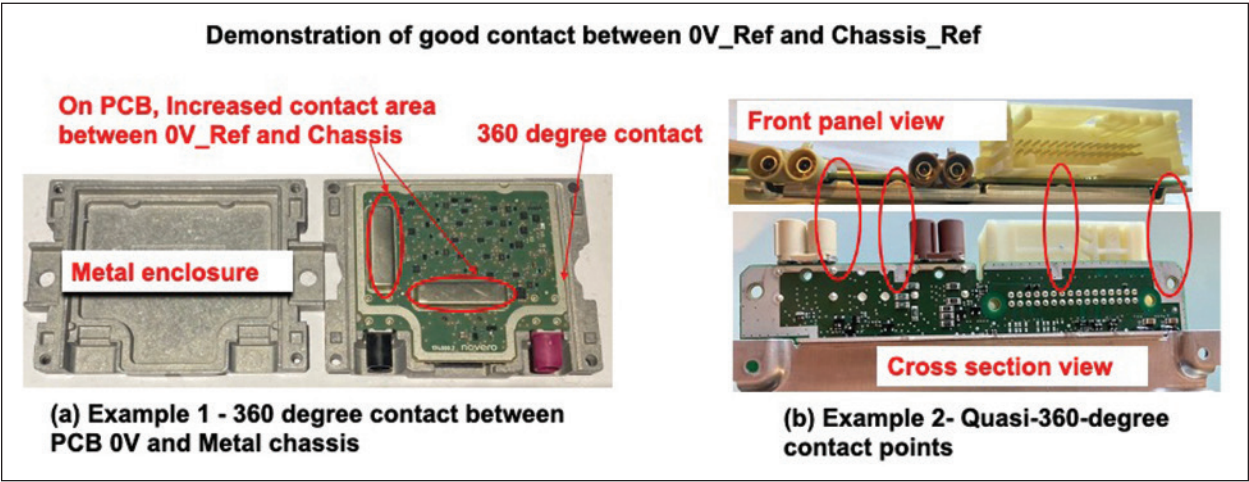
Demonstration of good contact between PCB 0V ref and chassis reference to reduce inductance
